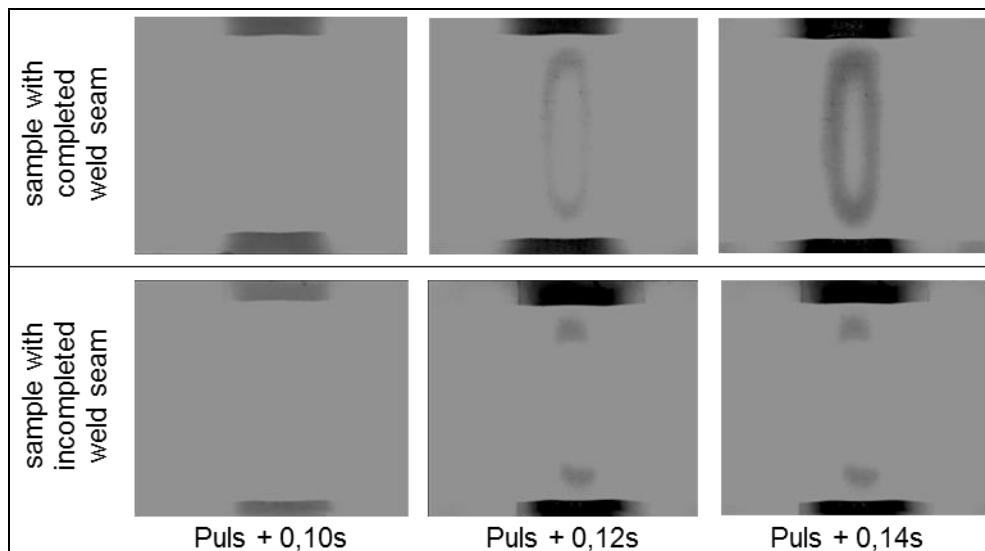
Inverted thermographic images during the induction-based thermal stimulation. Above: Sample with completed weld seam. Below: Sample with incompletely weld seam caused by a thin oil layer.
